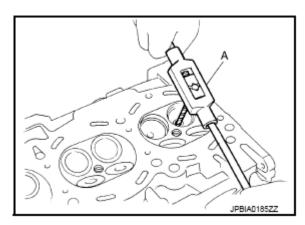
Reaming Cylinder Head Valve Guide (EXH) Hole Courtesy of NISSAN NORTH AMERICA, INC.
